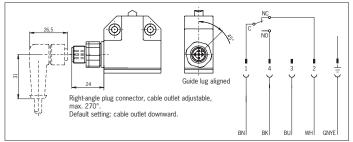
Dimension drawing/connection diagram for N01.550/562SVM5 with plug connector M12 (SVM5, 5-pin)
